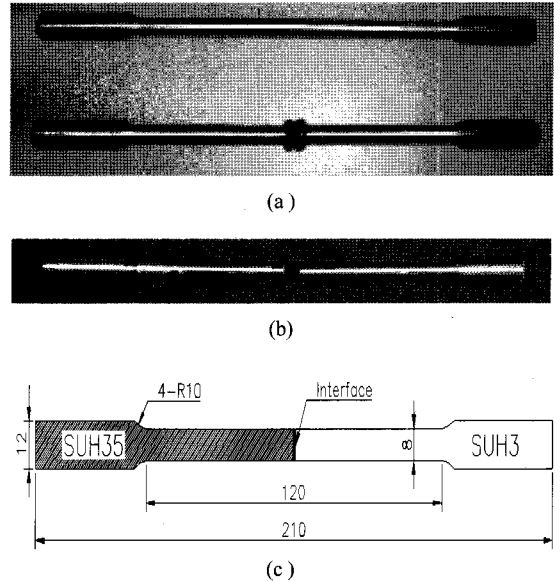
Shape of dimension of specimens on friction welded SUH35/SUH3
